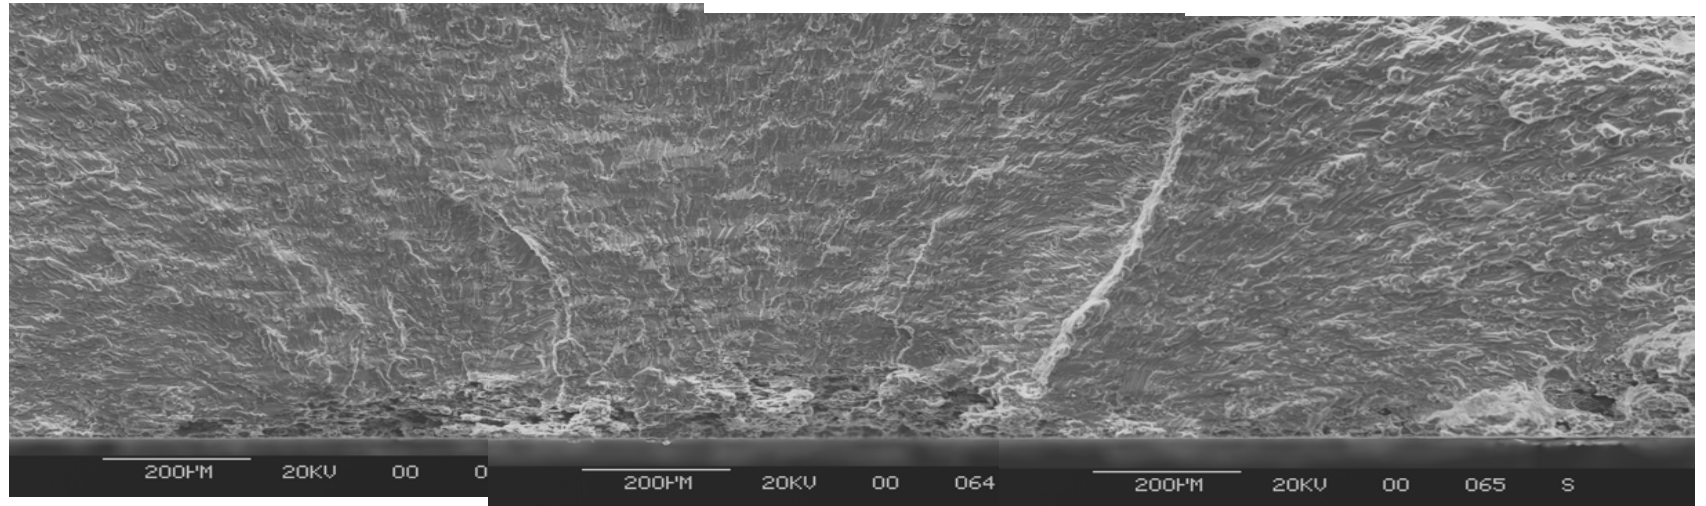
Composite Photo of Crack Origins on Specimen 6002.
